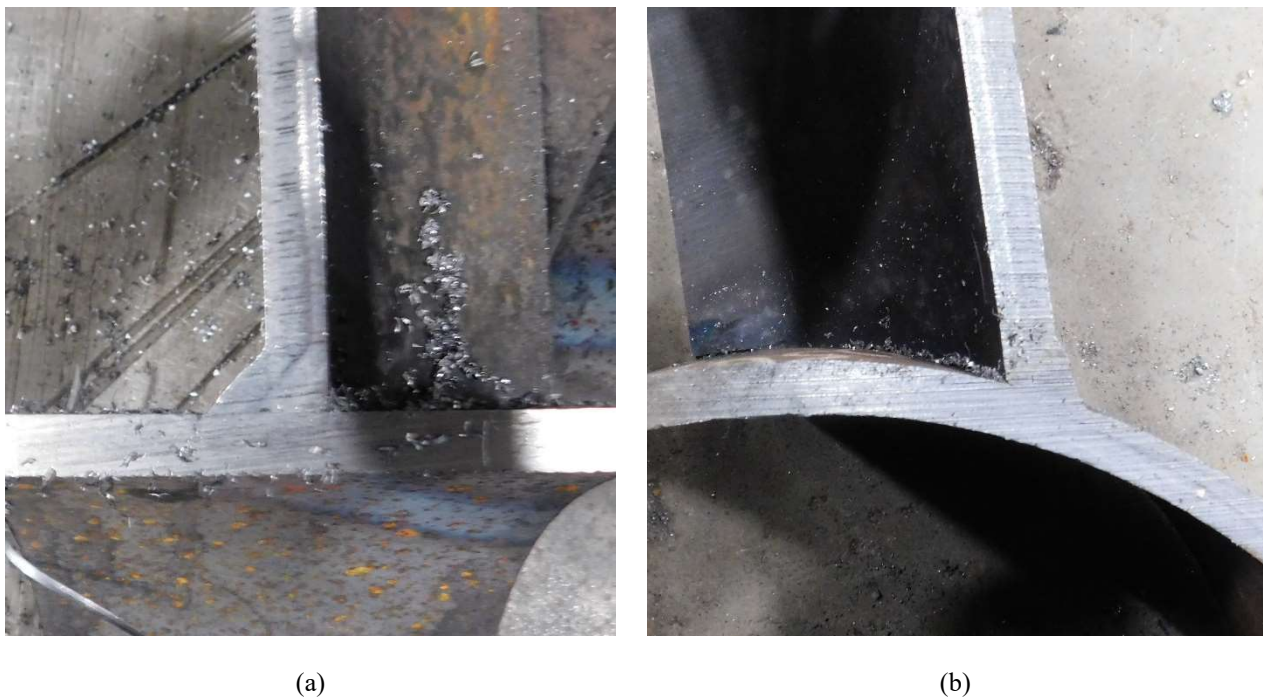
Cross-section of the welded trial specimens (a) fillet weld and (b) PJP weld
